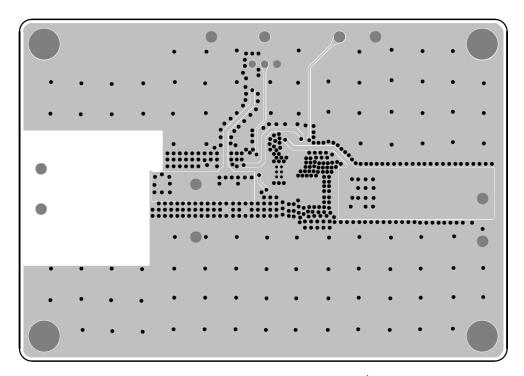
PCB Layout—Inner Side (3<sup>rd</sup> Layer)
